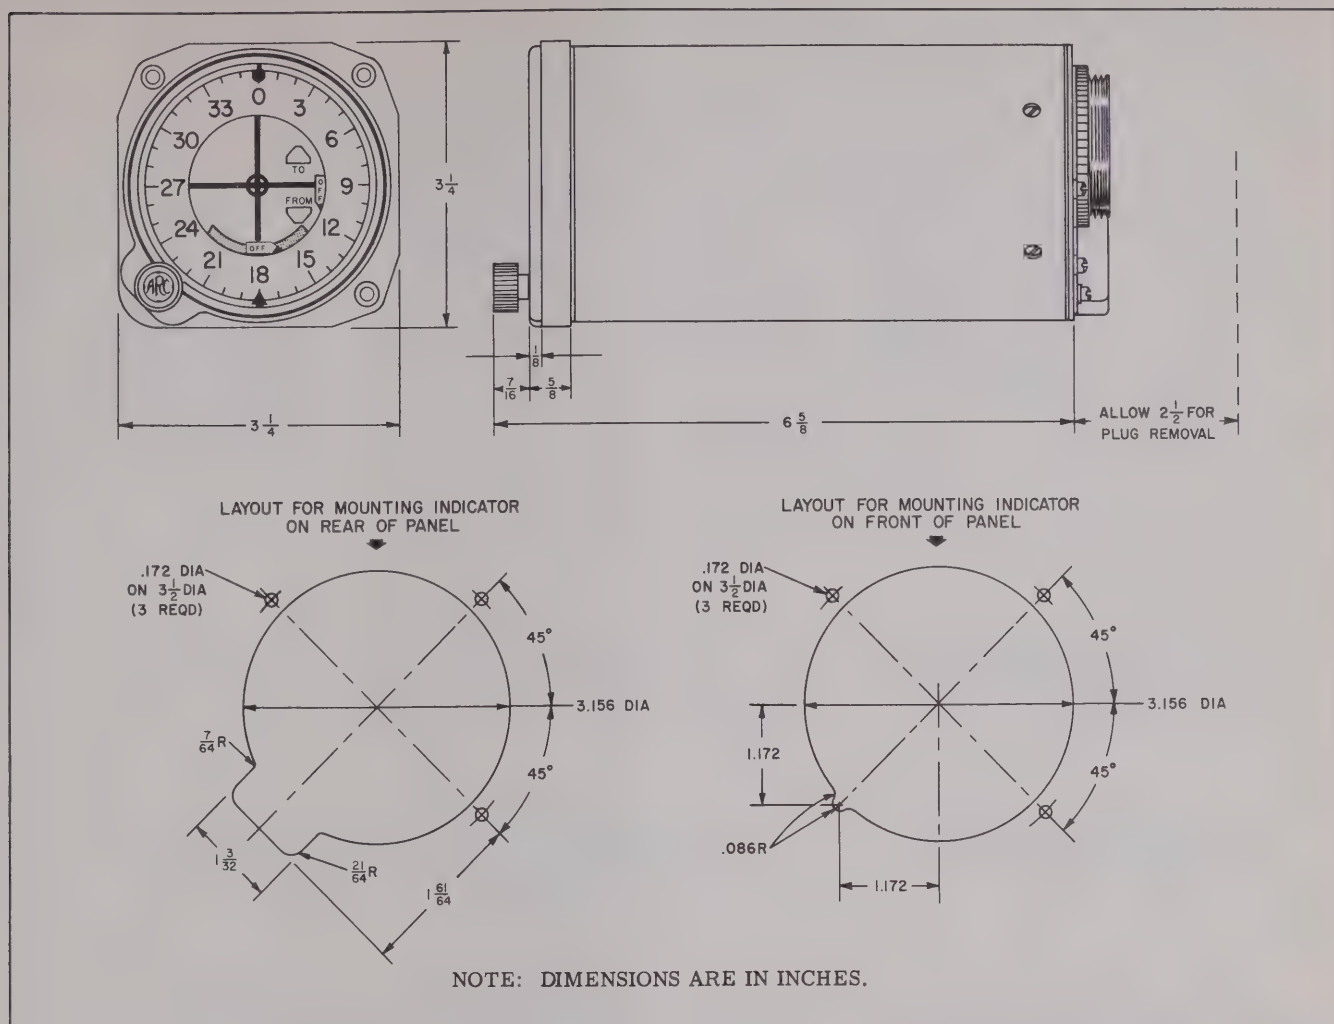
IN-10 and IN-14 Course Indicators, Installation Dimensions
